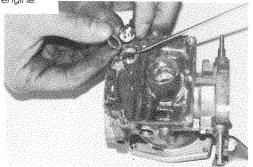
With the old needle valve removed, you can remove any sand or swarf that may be trapped behind it. The new valve should be refitted using a new soft alloy washer.
